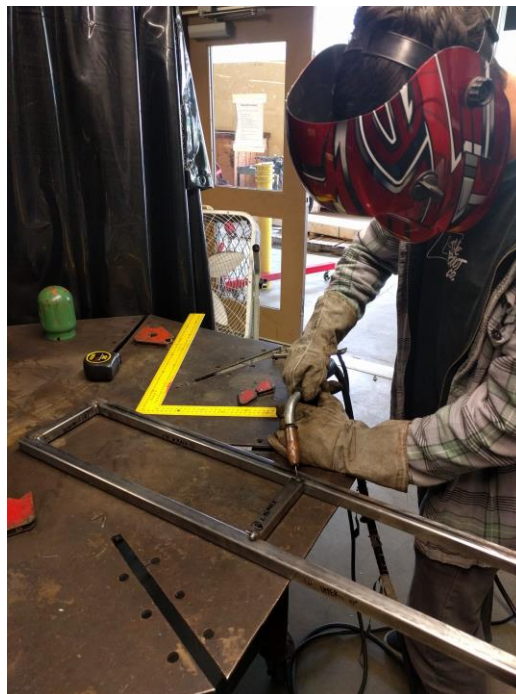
A photo of the prototype frame during MIG welding.
